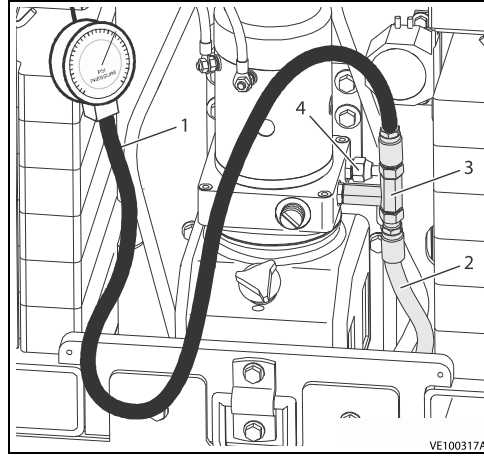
Typical Hydraulic Pressure Gauge Installation (Hydraulic Filter Removed)
